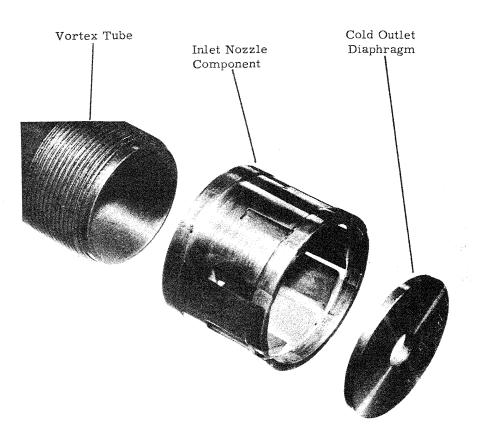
EXPLODED VIEW OF COLD OUTLET DIAPHRAGM, INLET NOZZLE COMPONENT AND TUBE.
